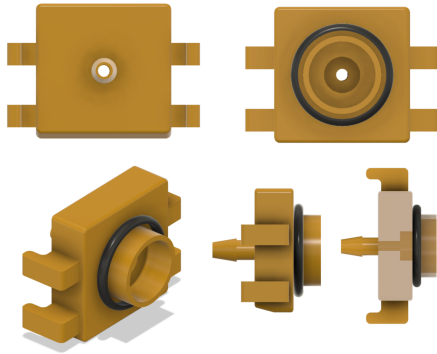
HFM chip cap. An O-ring with a diameter of seven mm should be stretched over the opening of the HFM chip cap.
